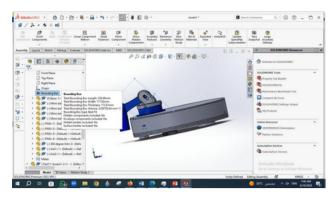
Full Assembly of multi-functional cleaner robot with arm robot
